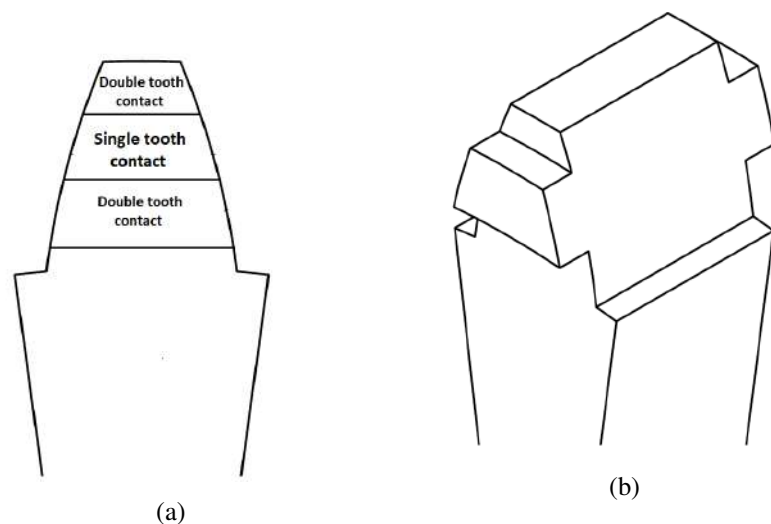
Tooth contact area (a) and modified gear tooth model (b).
